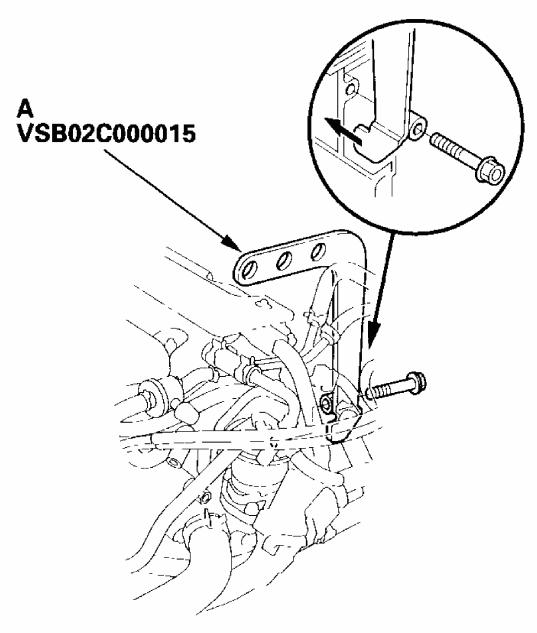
Removing Transmission Upper Mounting Bolts Courtesy of AMERICAN HONDA MOTOR CO., INC.
